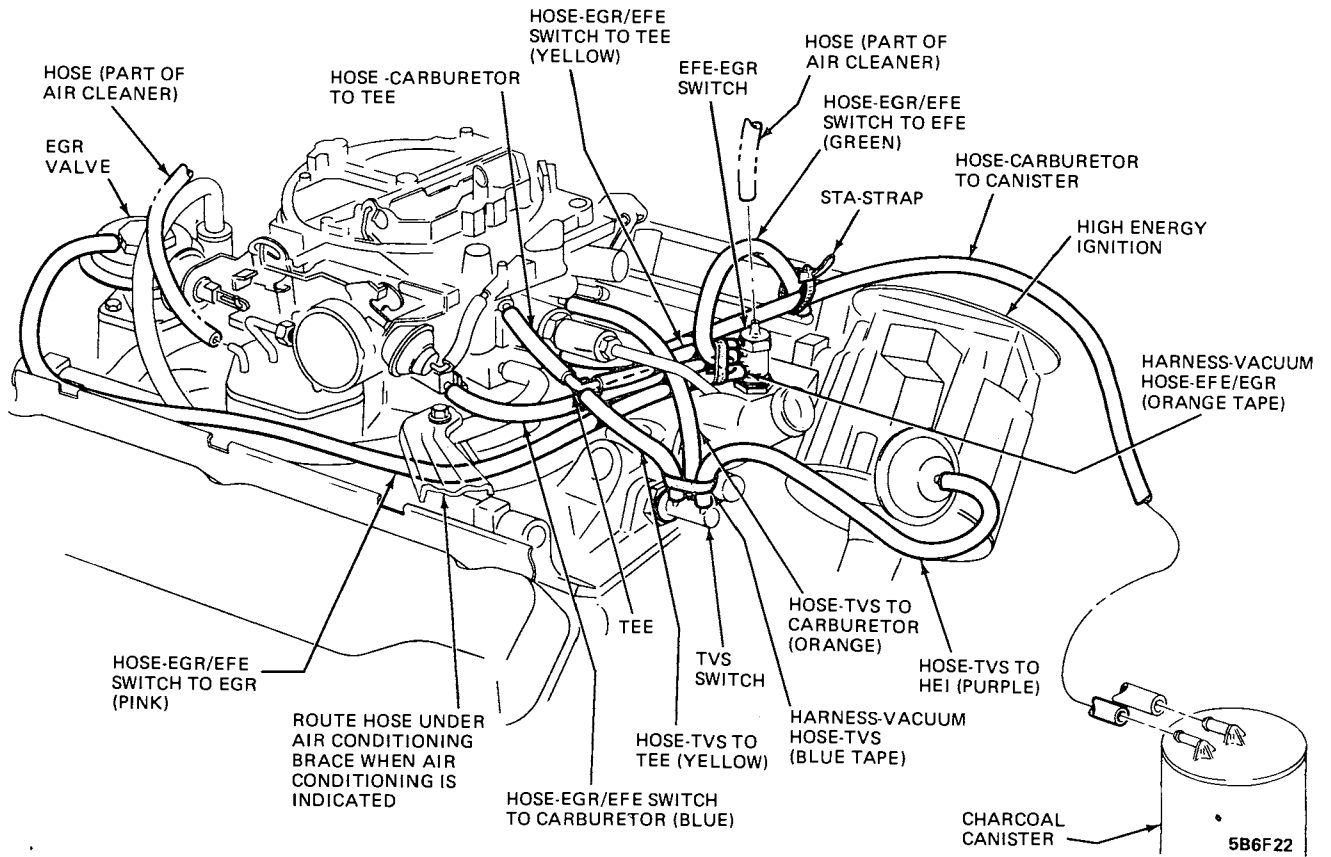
F-33 - 350 4 Bbl. Engine Vacuum Hose Routing less A.I.R.
